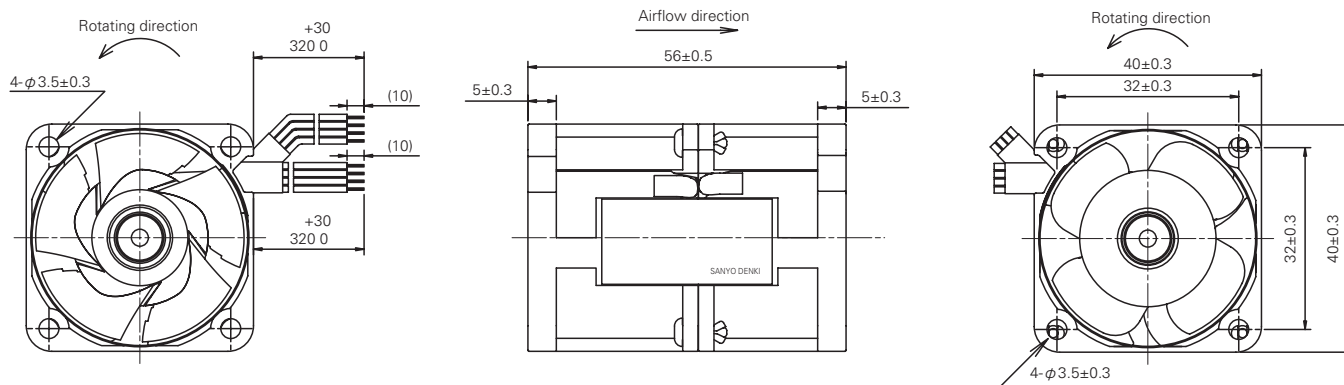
40 mm sq., 56 mm thick CRE type dimensions (Units: mm)
